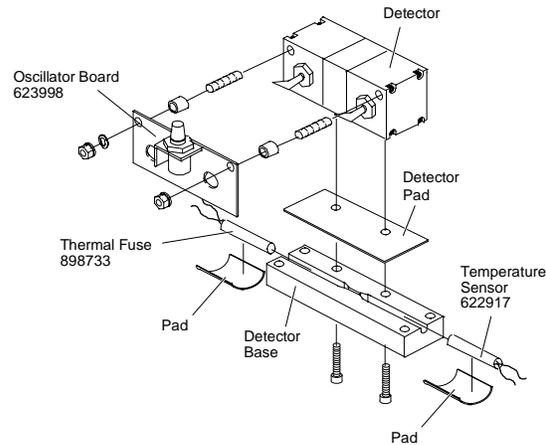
DETECTOR ASSEMBLY REMOVAL/INSTALLATION
